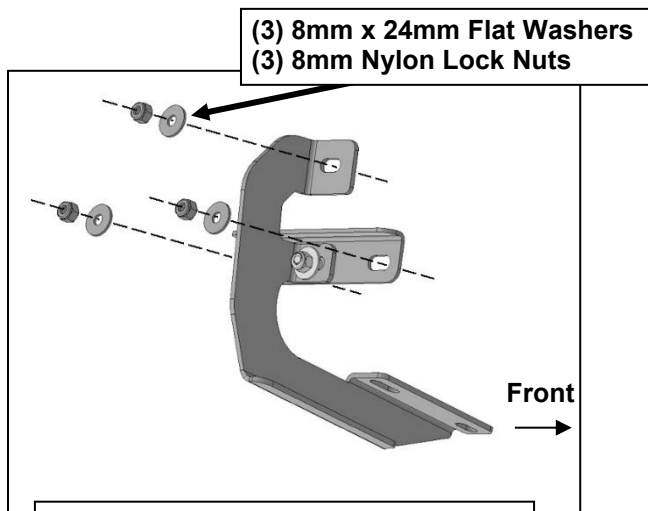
Attach the front/rear Mounting Bracket assembly to the (3) threaded studs in the front mounting location
